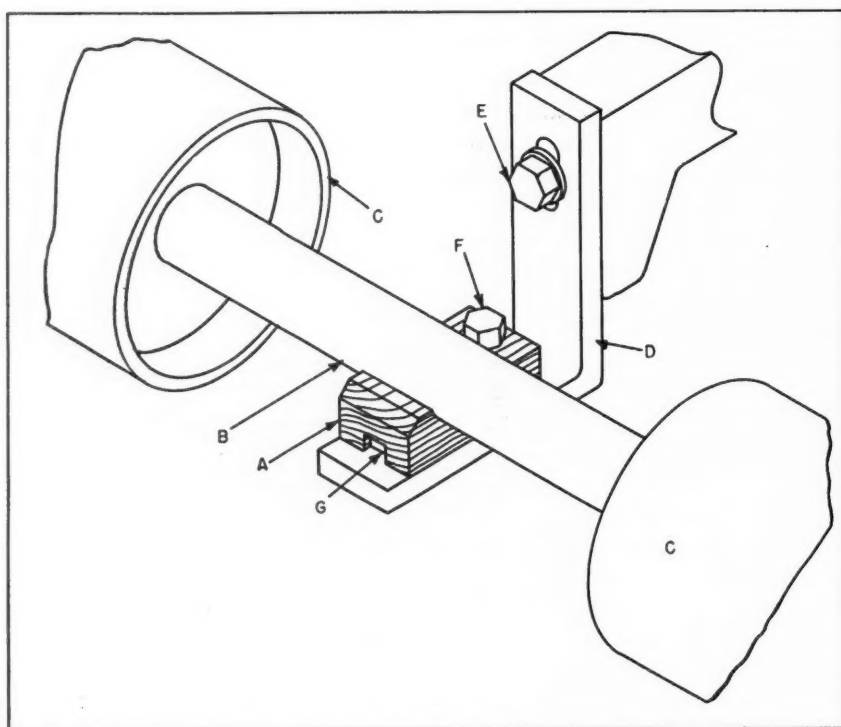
Sizing solution is applied to nylon threads as they pass through a winding machine by rollers (C). The danger of contaminating the sizing solution with oil is eliminated by using the self-lubricating wood bearing (A)
